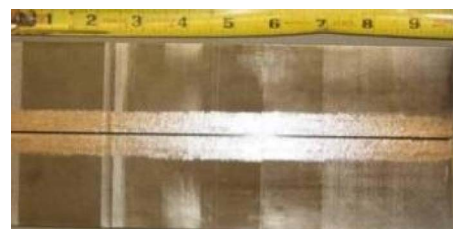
Plate of 247.7 mm length with 1.5 mm groove machined in the center
